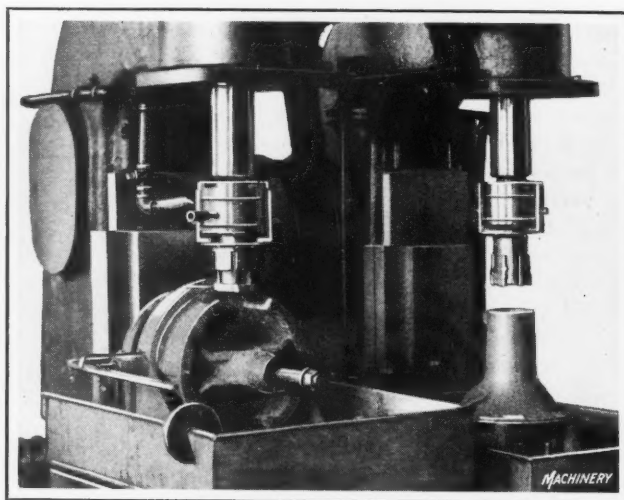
Fixtures and Tools used in Tapping Operations on the Carrier
